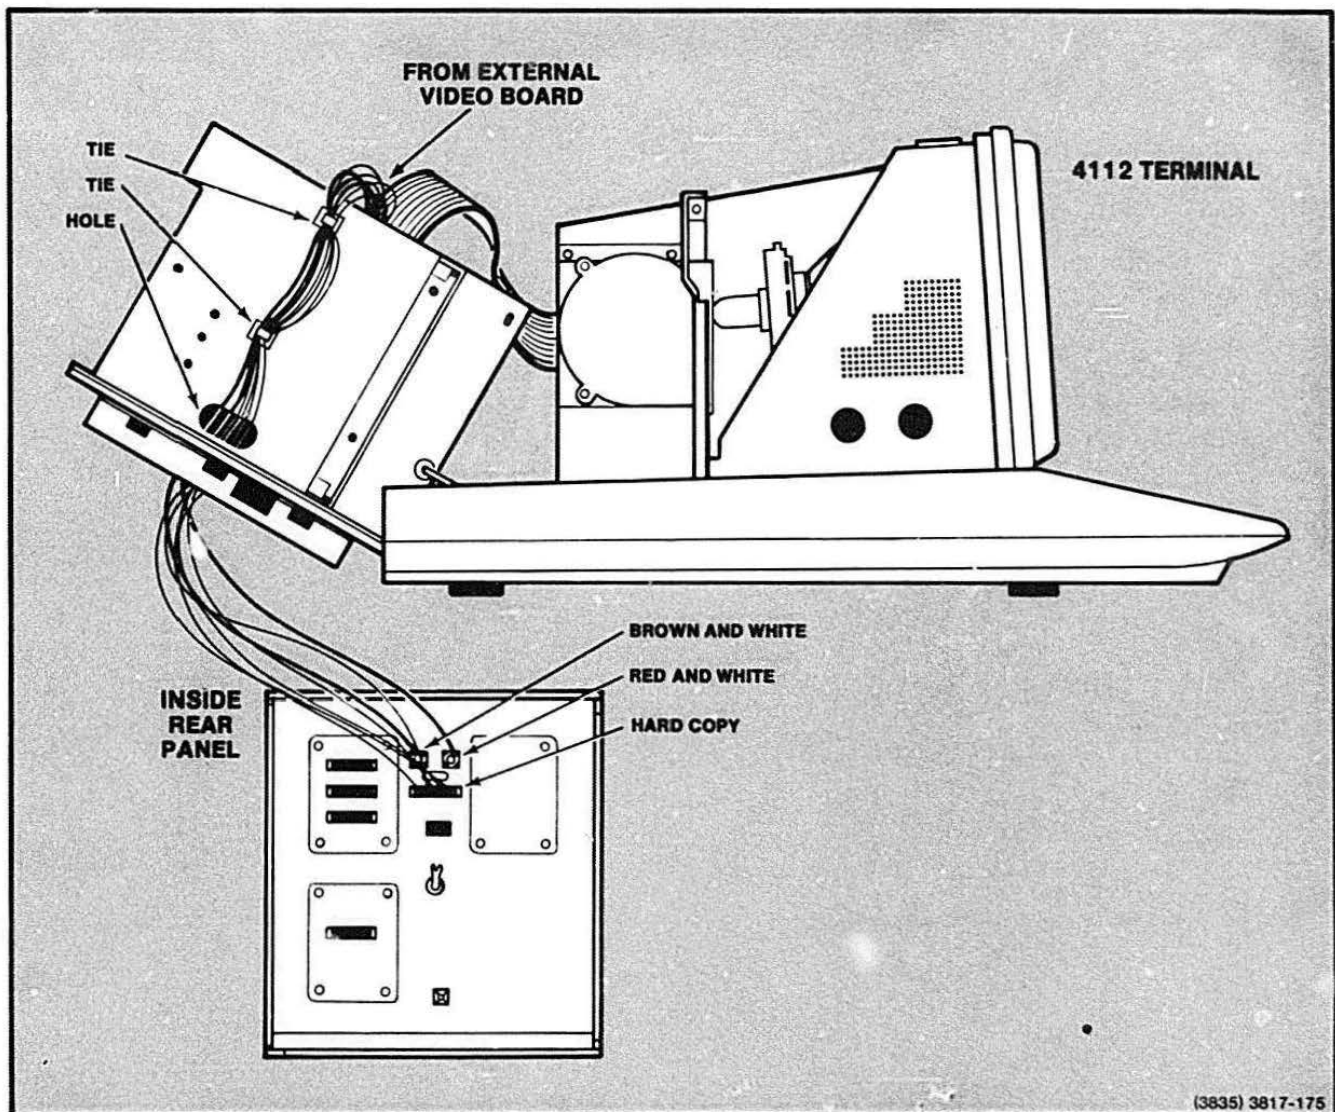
Cable Route, via Card-Cage to Rear Panel.
